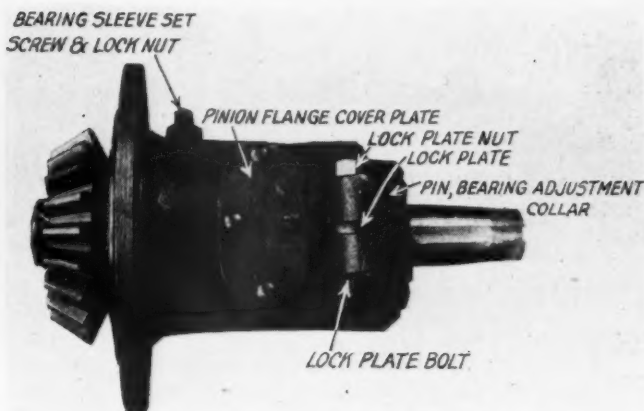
The Pinion Flange Assembly, Having a Set Screw With Lock Nut, the Set Screw Preventing Turning of the Adjusting Collar Shown in Fig. 12
